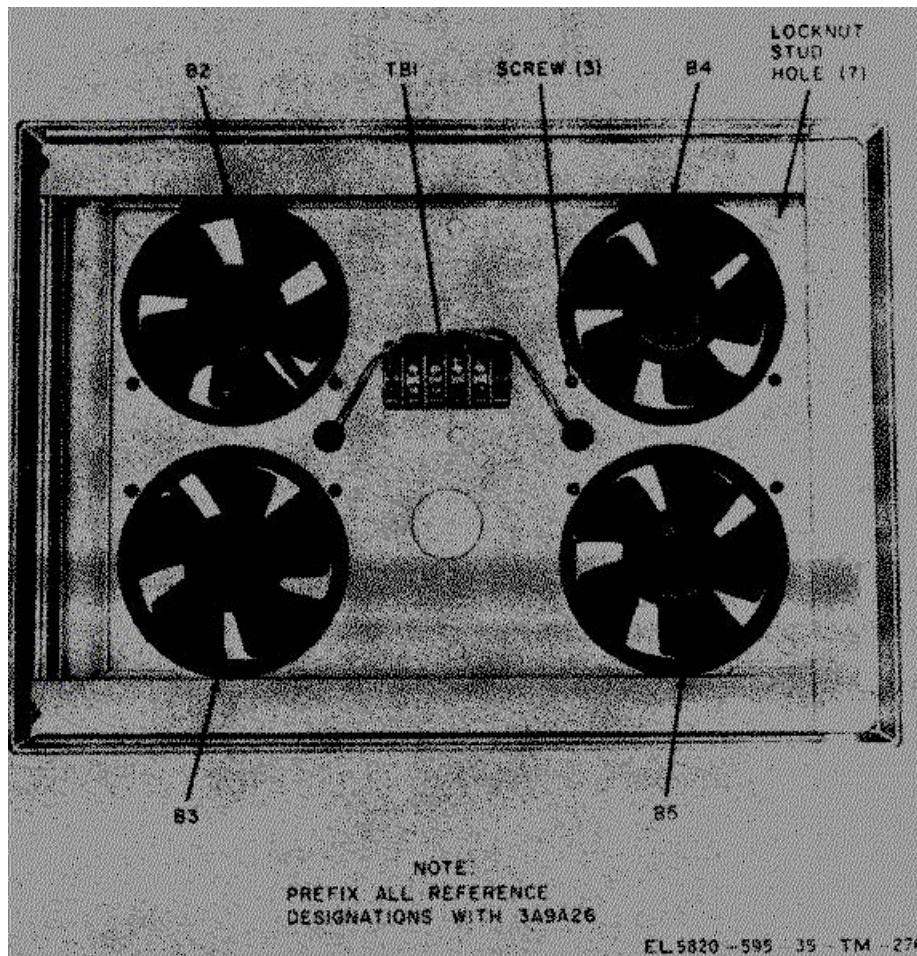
Fan assembly 3A9A26, viewed from filter side, parts location.
